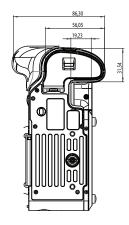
Technical drawing of the XF camera system [mm] source: Phase One CAD files.
